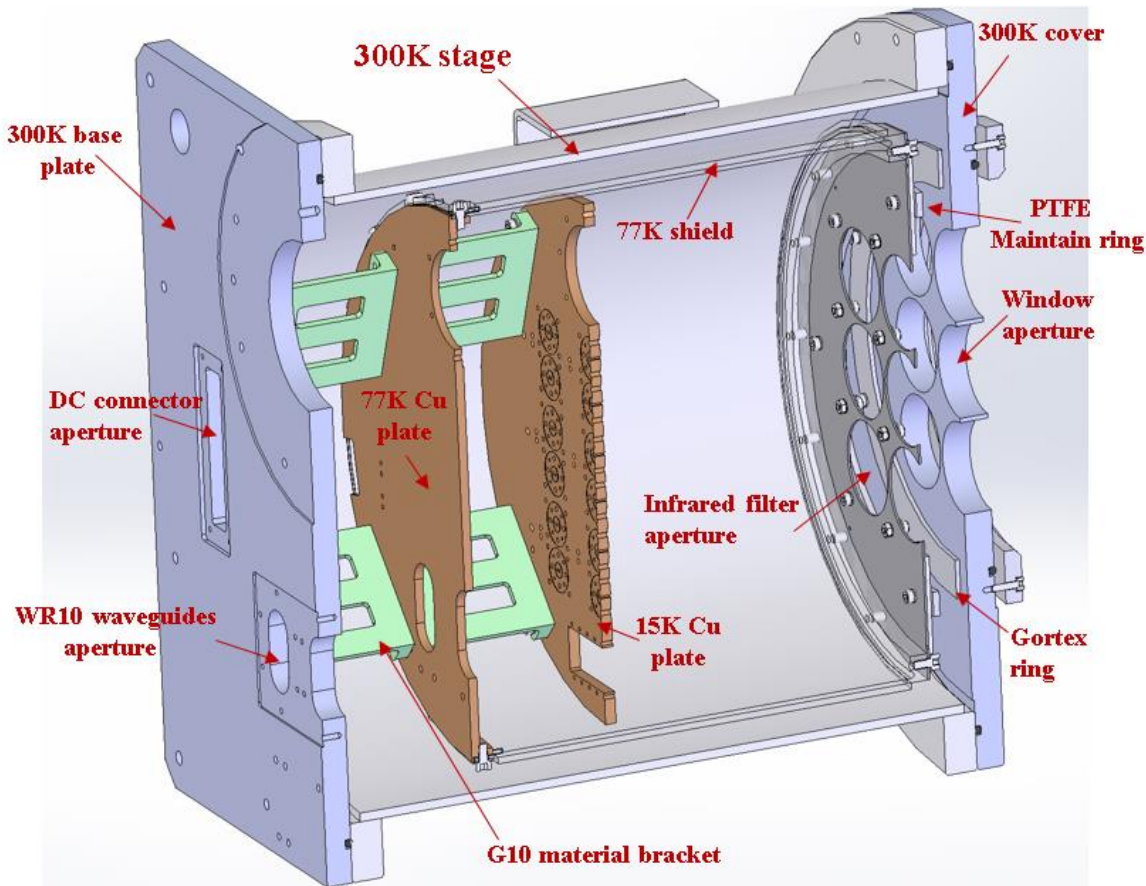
3D-drawing illustrating the manufactured cryostat.
